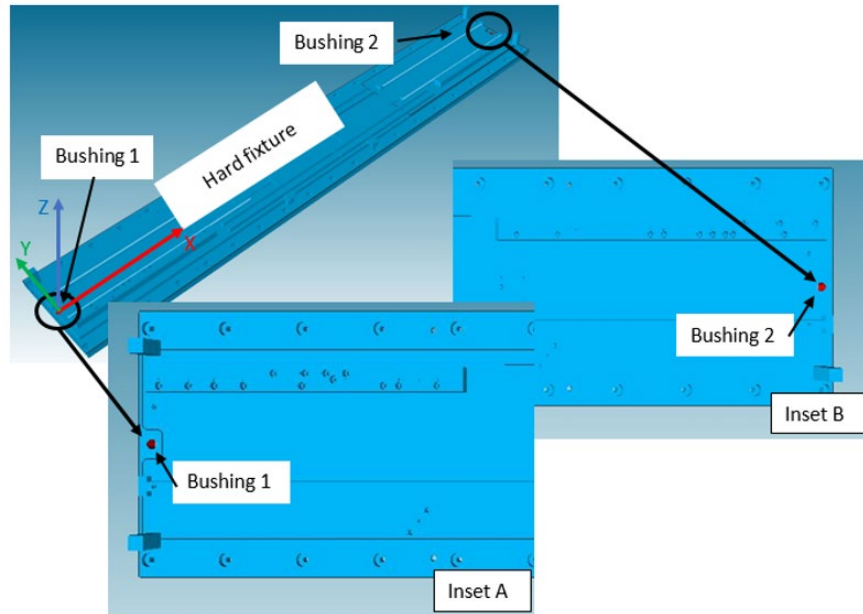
Schematic illustrating the arrangement of the two (2) calibrated bushings embedded on the hard tool to be used to qualify the Bavuis CNC machining center, by probing with the Renishaw Rengage probe. Bushings are labeled as Bushing 1 (left) and Busing 2 (right). Insets A and B show close, top views of area surrounding the bushings.
